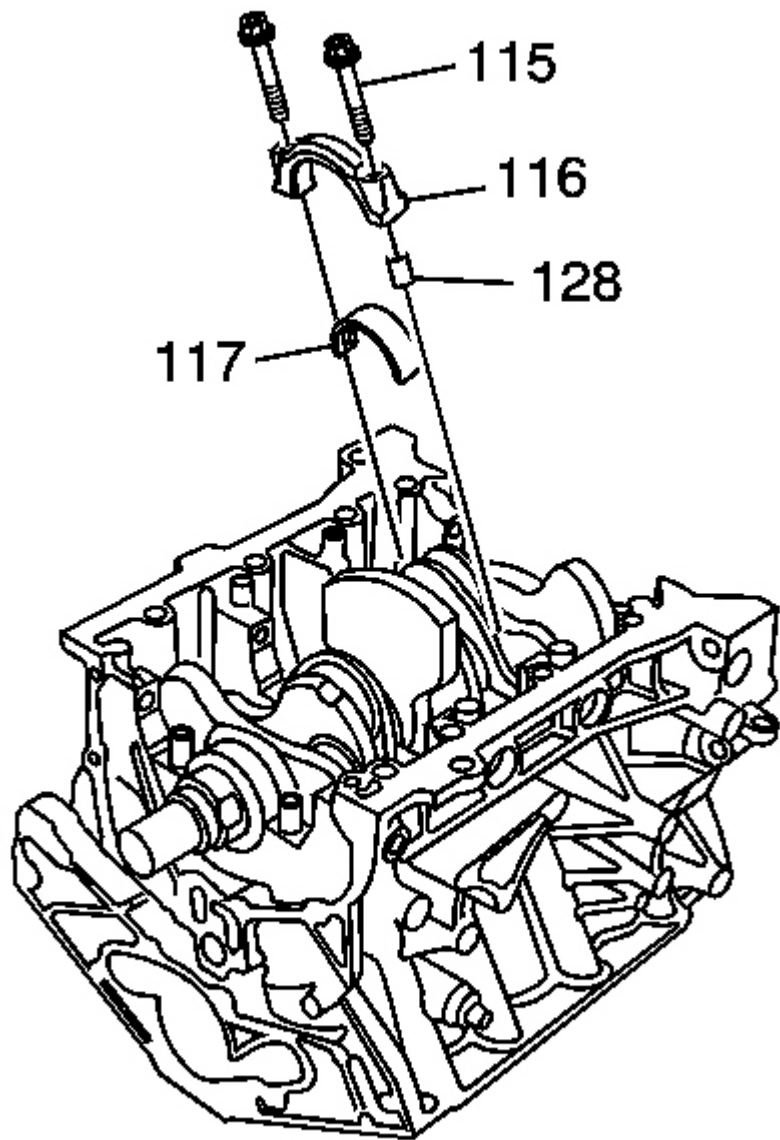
View Of Bolts, Cap, Pins & Lower Bearing Half
